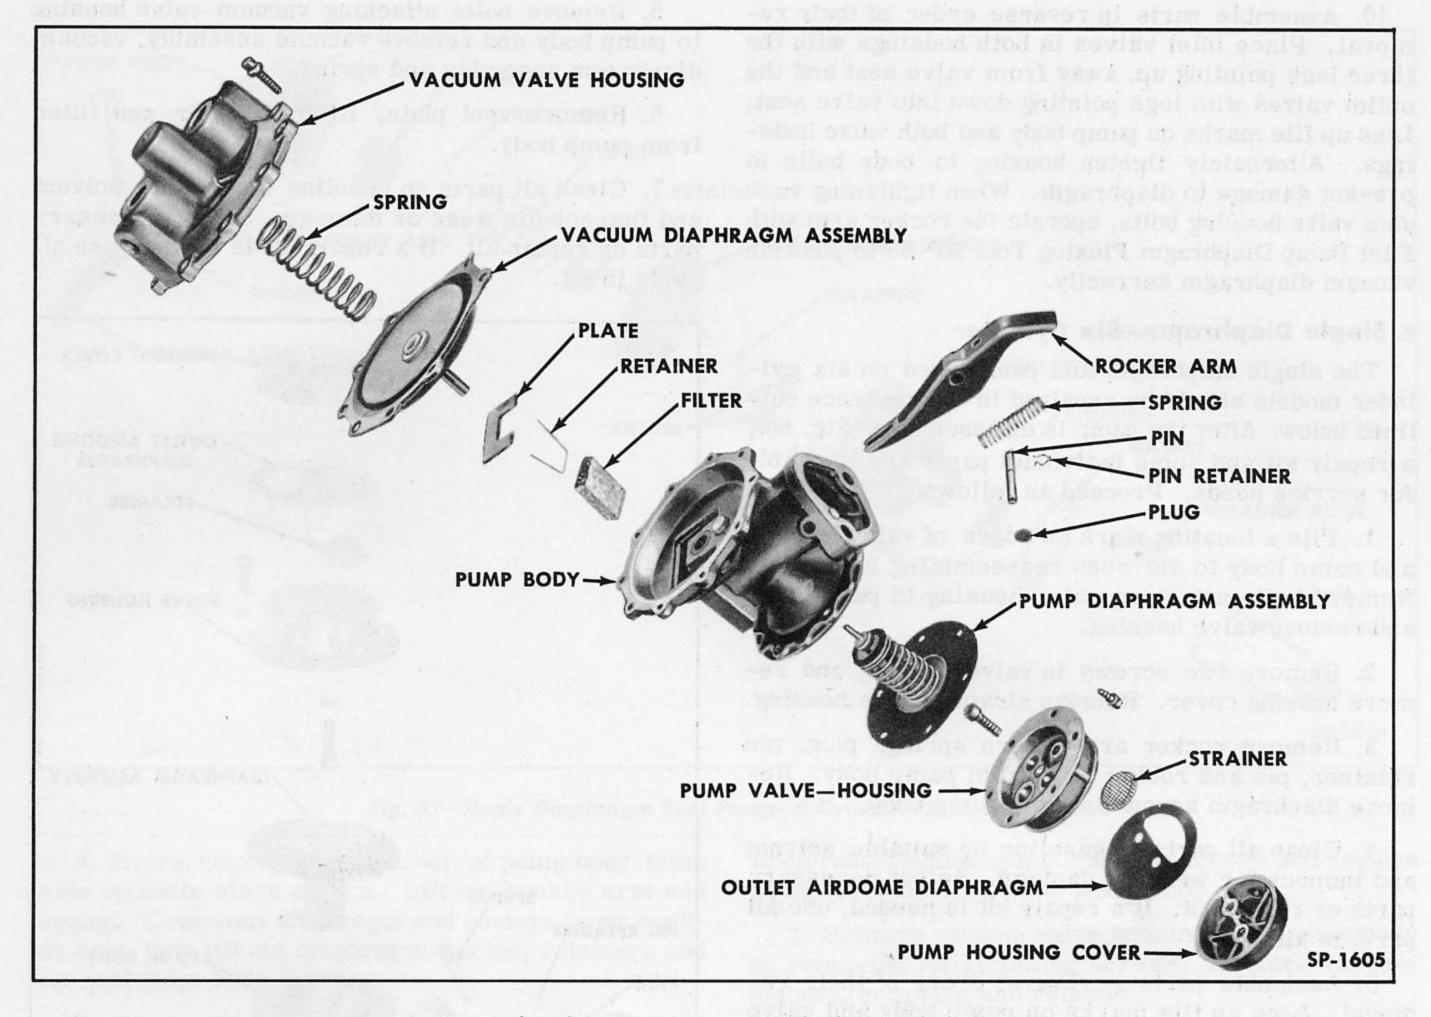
Fuel and Vacuum Pump—6 Cylinder—Exploded View
